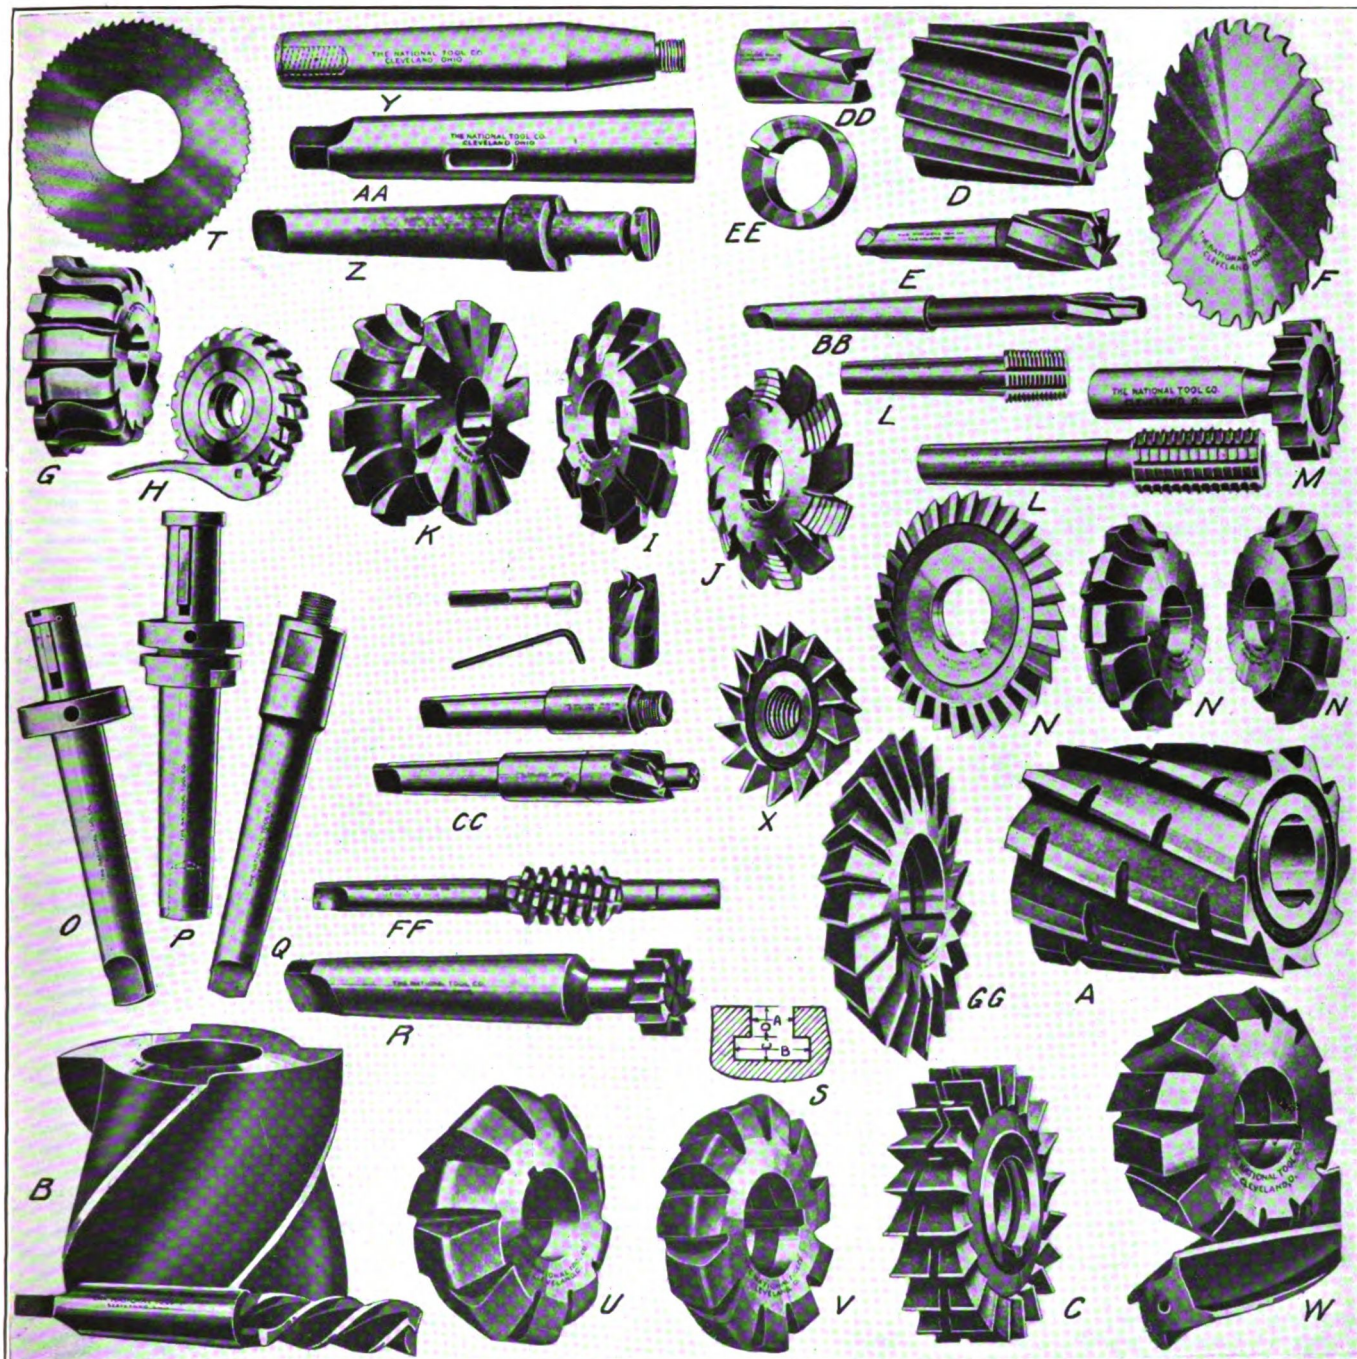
Additional Cutting Tools and Auxiliary Products of the National Tool Company
